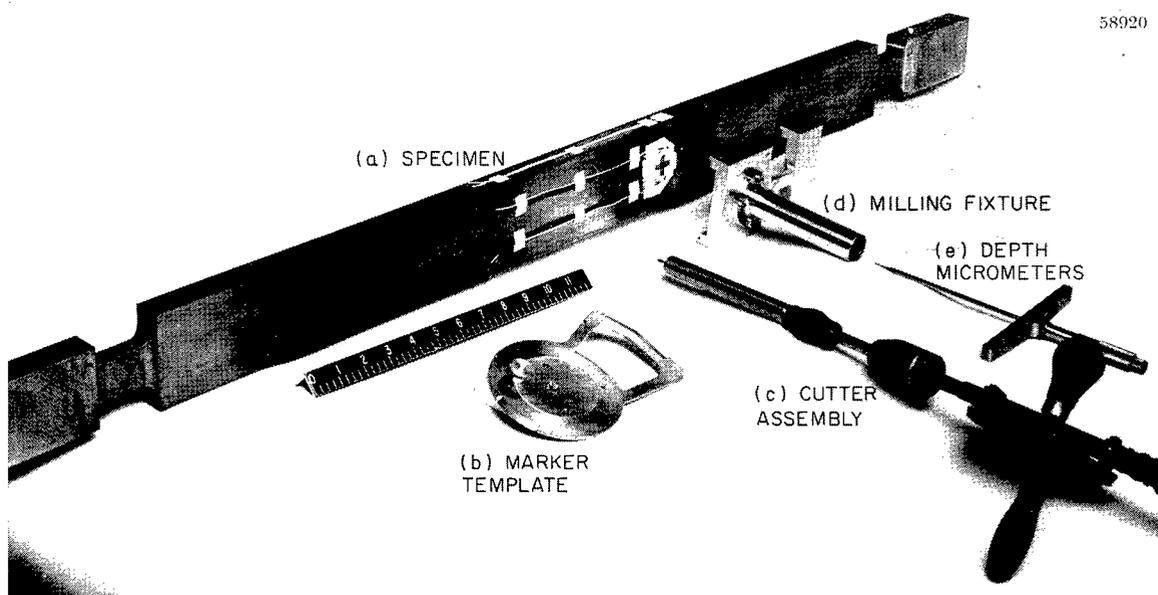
Specimen and hole-drilling and gage-mounting hardware: (a) 1 in. x 3 in. cold rolled steel specimen with a double 0° , 90° strain gage rosette and monitor gages in position ready for test, (b) marker template for positioning the gage location lines, (c) cutter, boring bar, flexible coupling, and hand drill assembly, (d) milling fixture to guide the cutter assembly, and (e) micrometers to measure the hole depth
